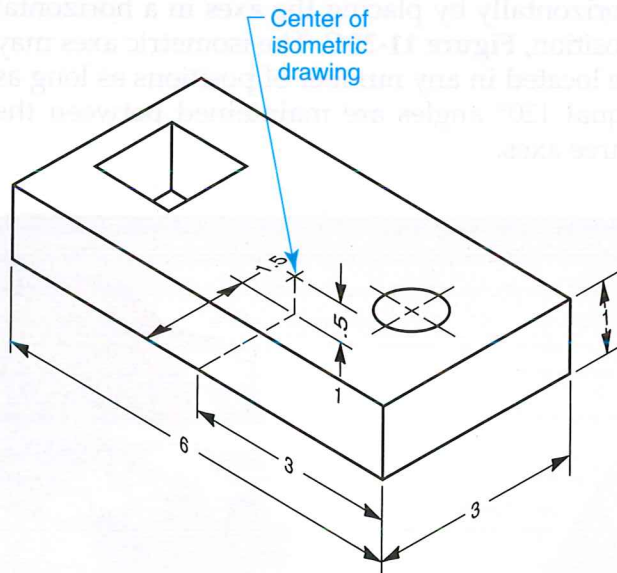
To center an isometric drawing, first locate the center of the object. Then place this point in the center of the sheet or work space. This method can also be used to locate an isometric view at any desired location on the sheet.
